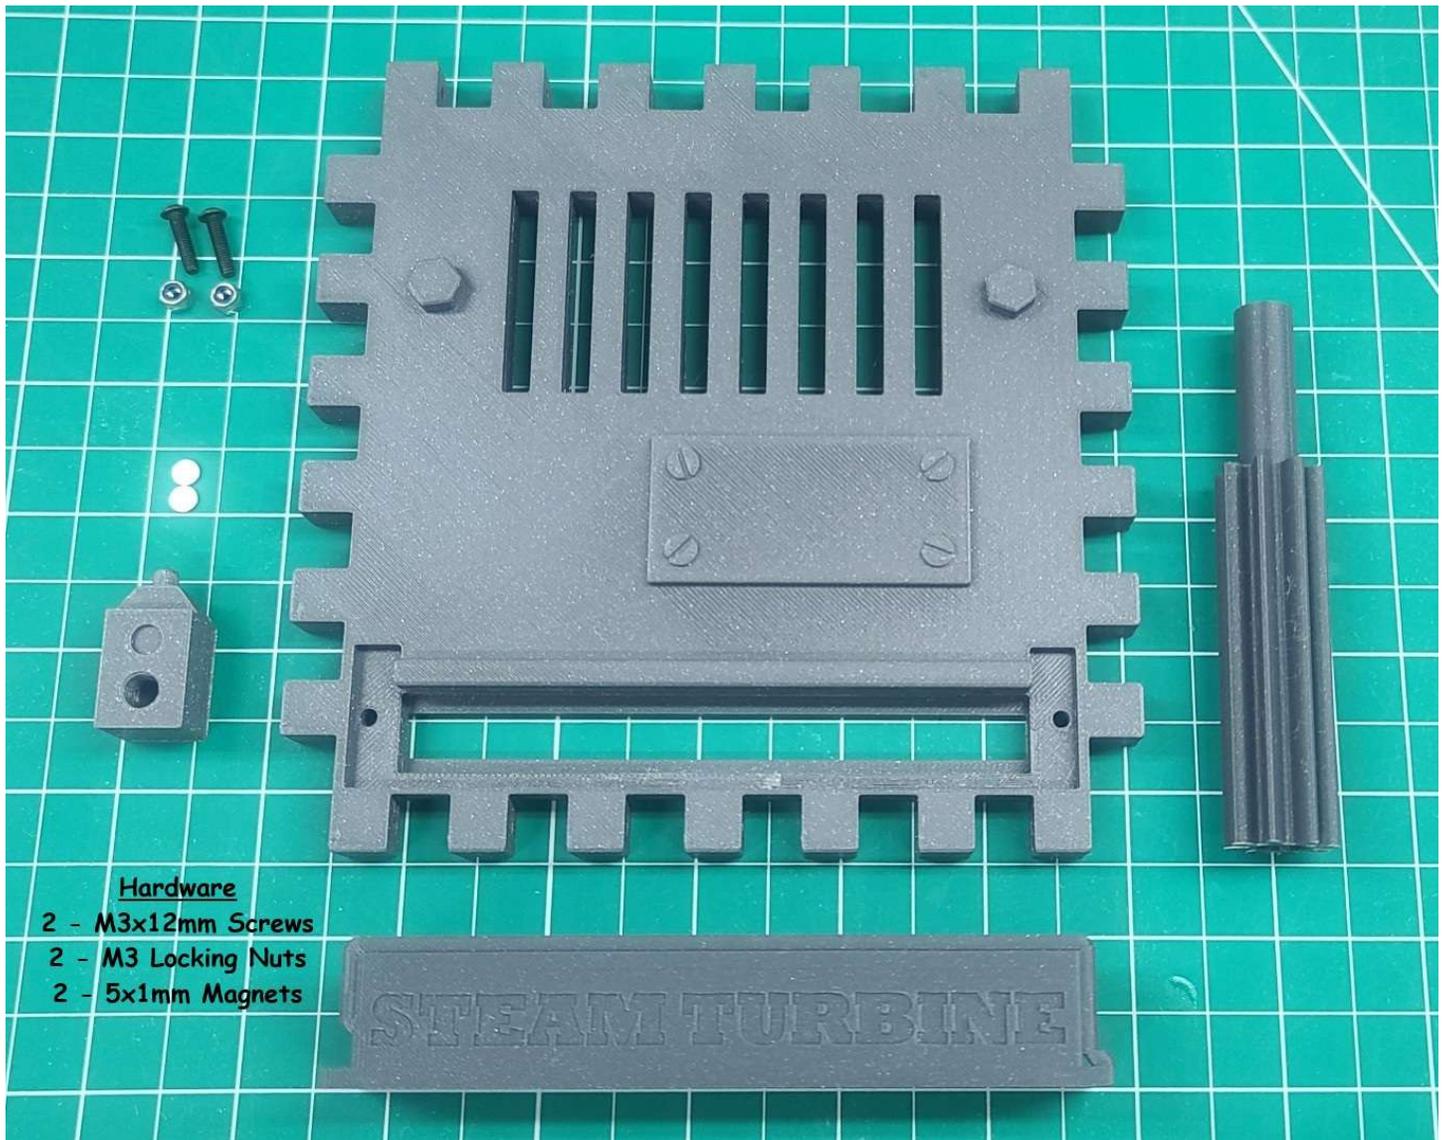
Side 1 Printed Parts and Misc. Hardware
